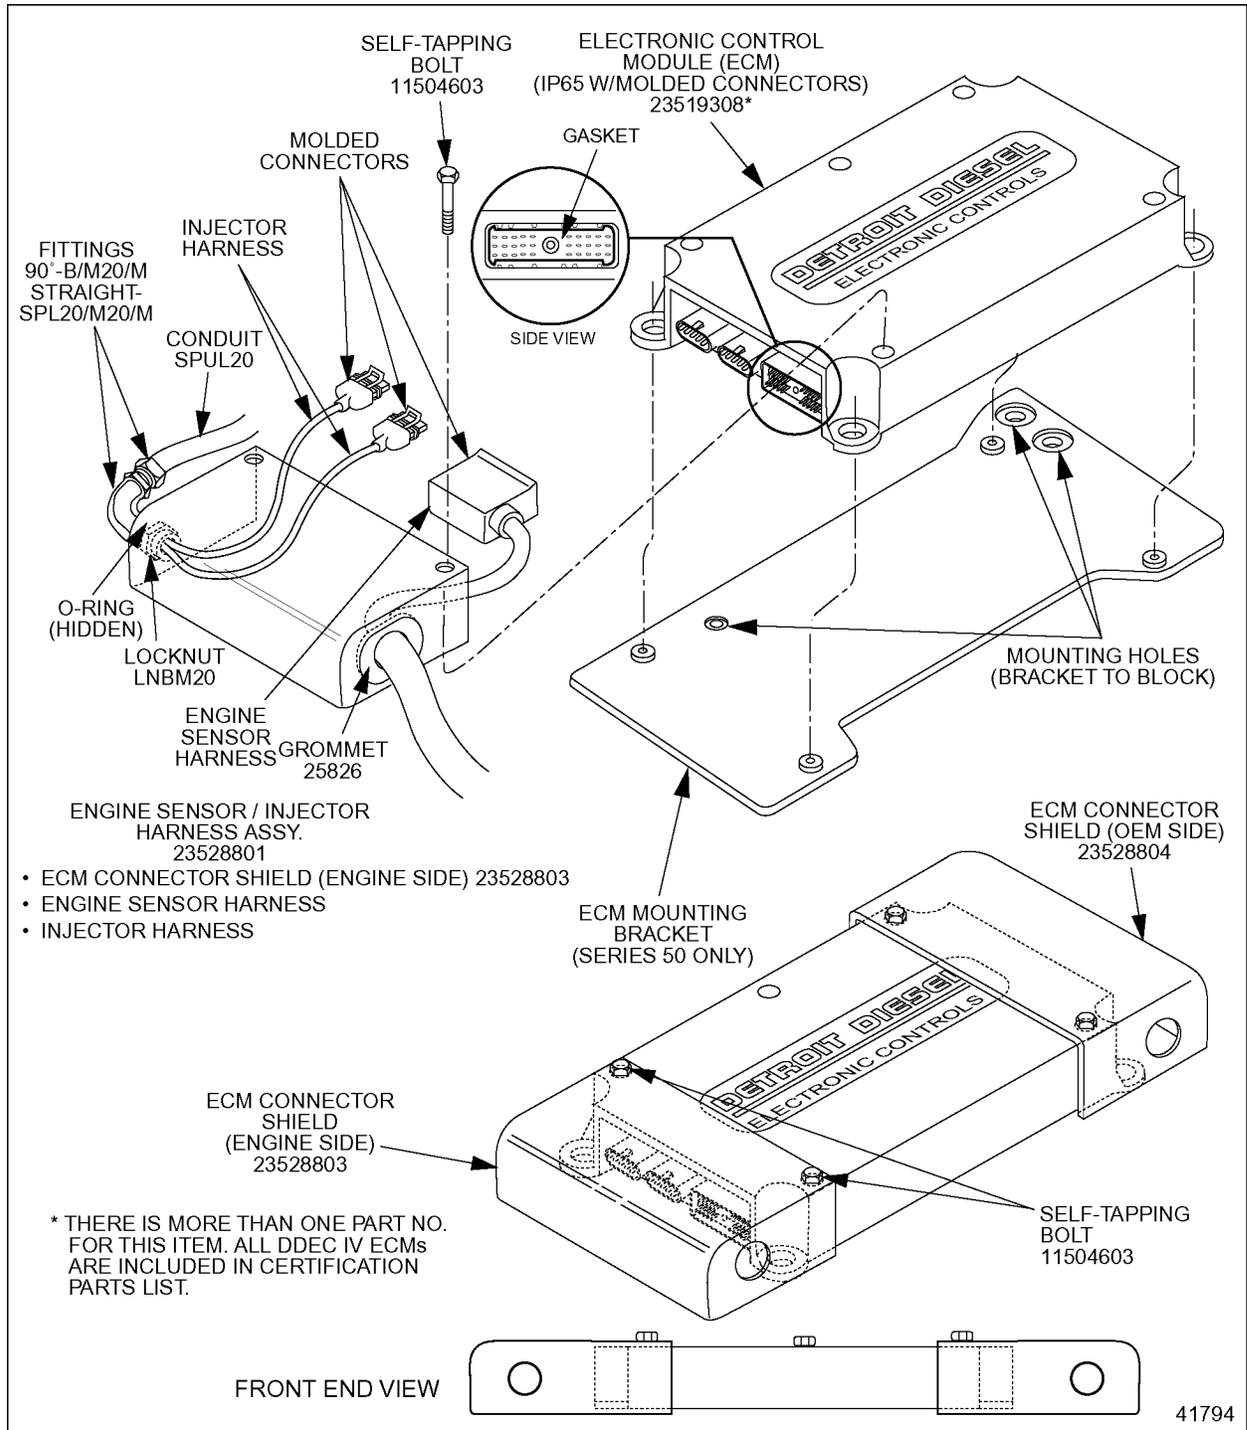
Series 50/Series 60 Engine Side Connectors, Cables, and Shield
